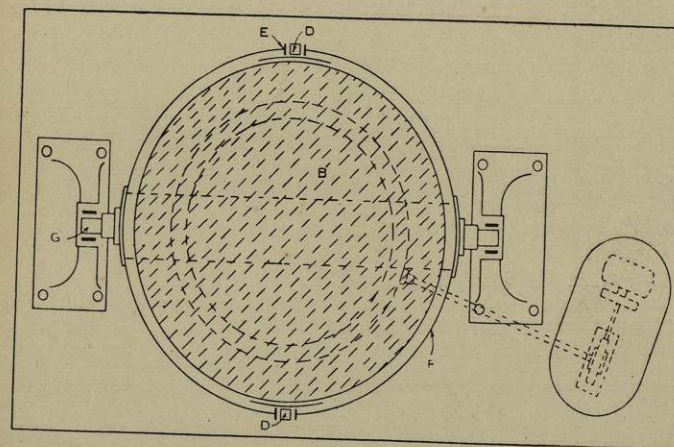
The Stassano Rotary Furnace, latest form (plan).
